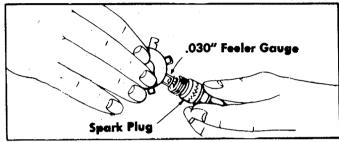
SPARK PLUG CLEARANCE REPLACING BLADE
